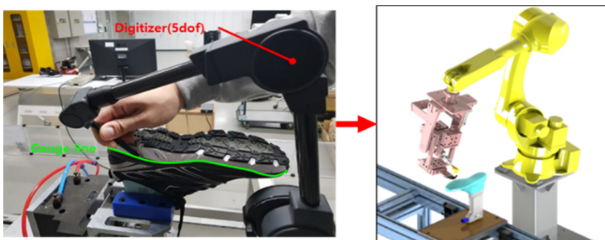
Example of the proposed automation process of drawing a gauge line with the 3-D device (left) and gluing (right)
